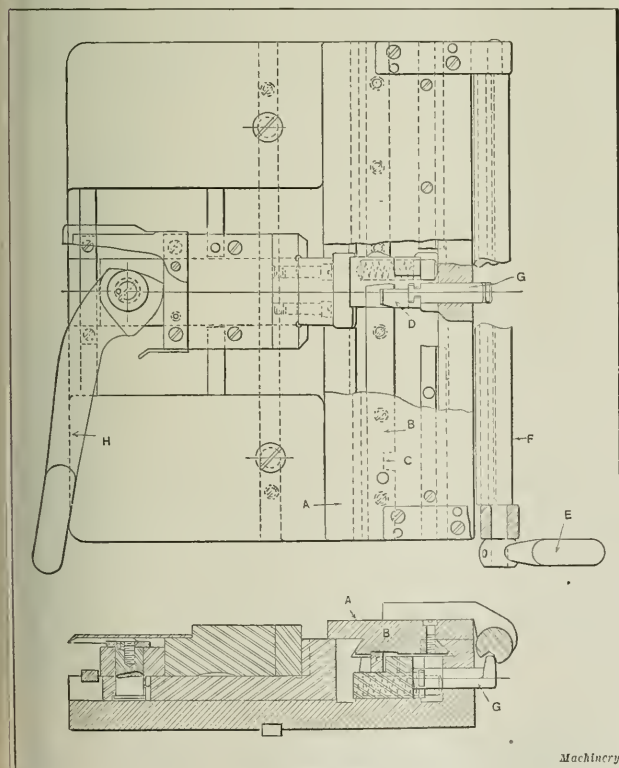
Profiling Fixture equipped with Indexing Slide for locating Three Different Formers in the Operating Position
